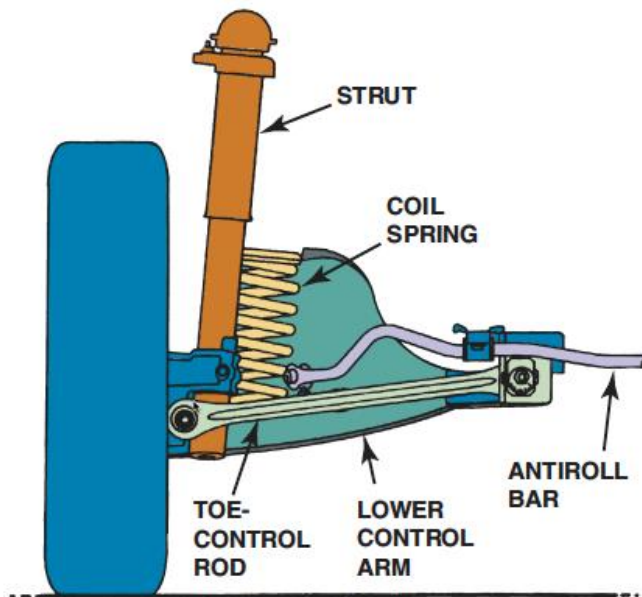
Toe is adjusted at the inner end by an eccentric bolt.
